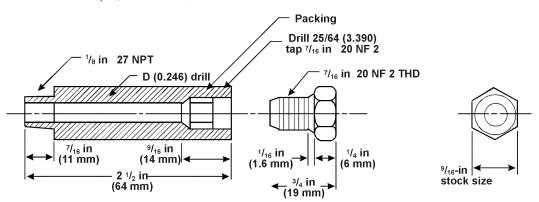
Btu Heat Transfer Device—Thermometer Mounting
